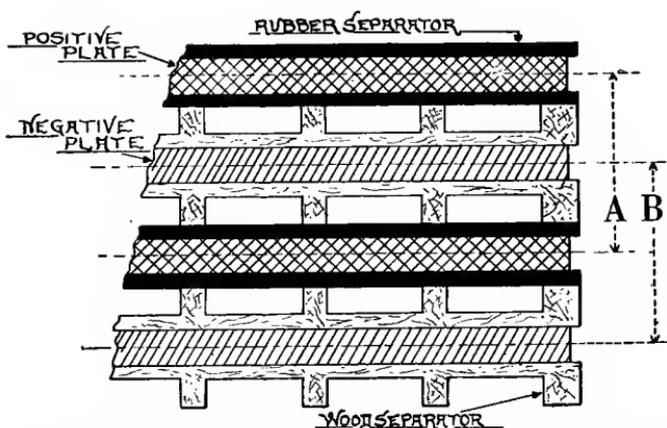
Showing Plate Centers and Arrangement of Plates and Separators.
